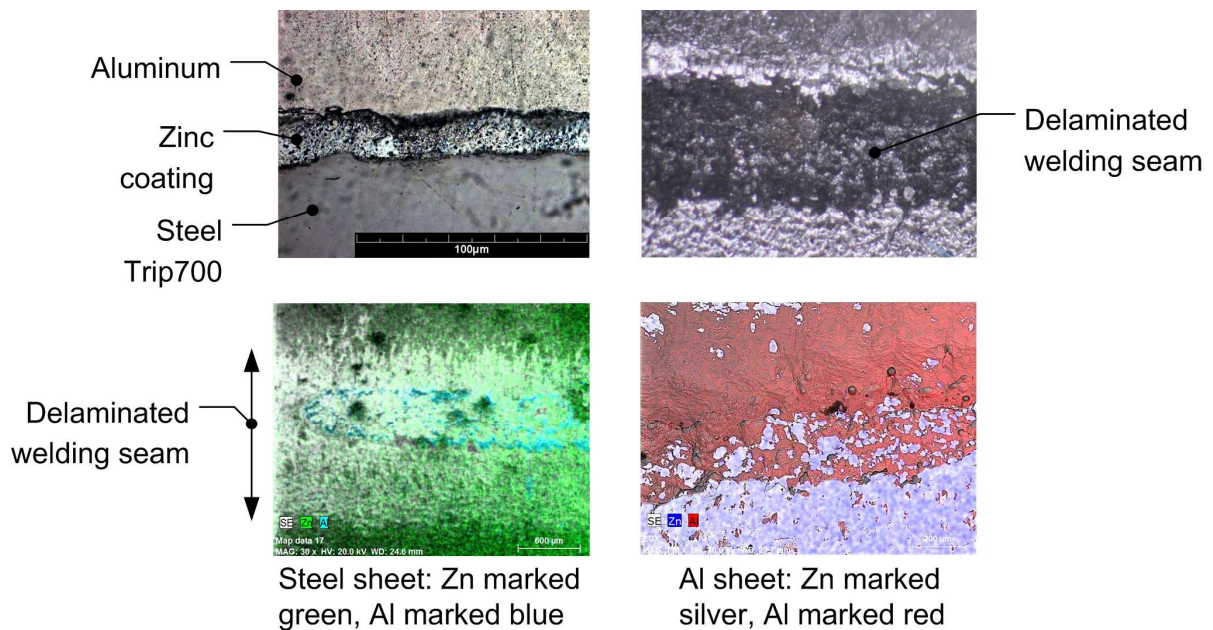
Microsection of an EMPT weld Aluminum to zinc coated steel TRIP 700 and analysis of the tensile test specimen failure
